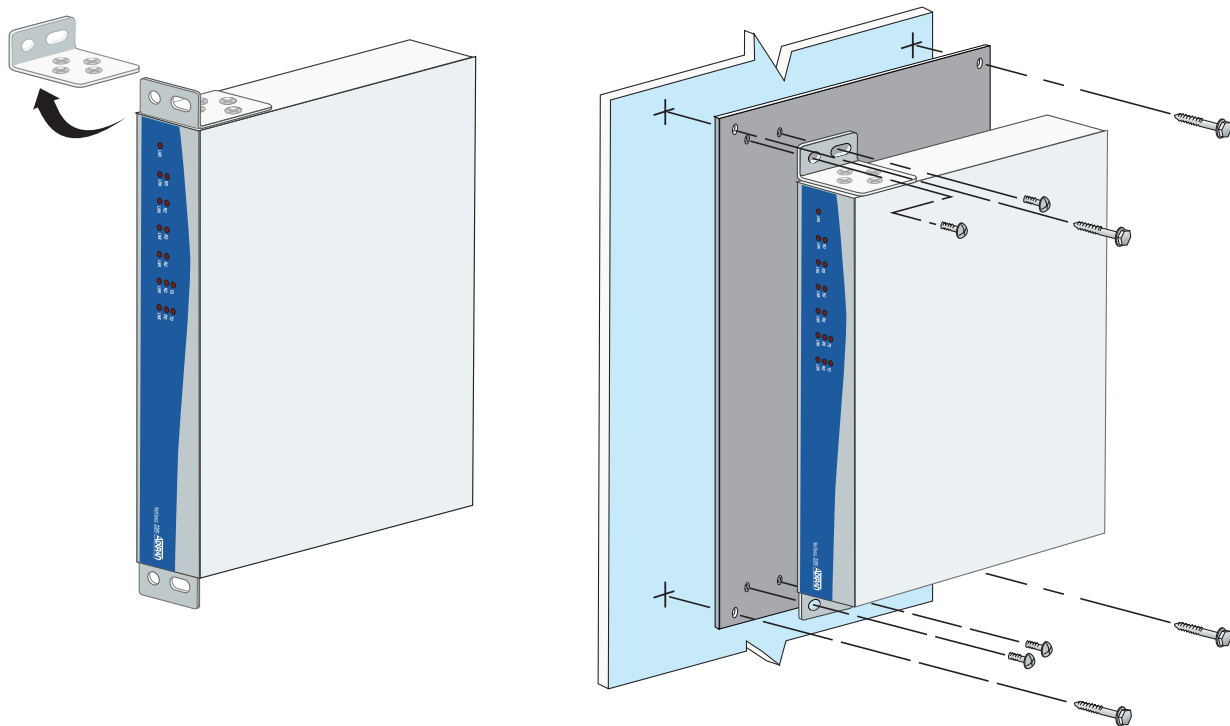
Repositioning the Mounting Bracket for Wall Mounting the NetVanta 3205/NetVanta 3305
